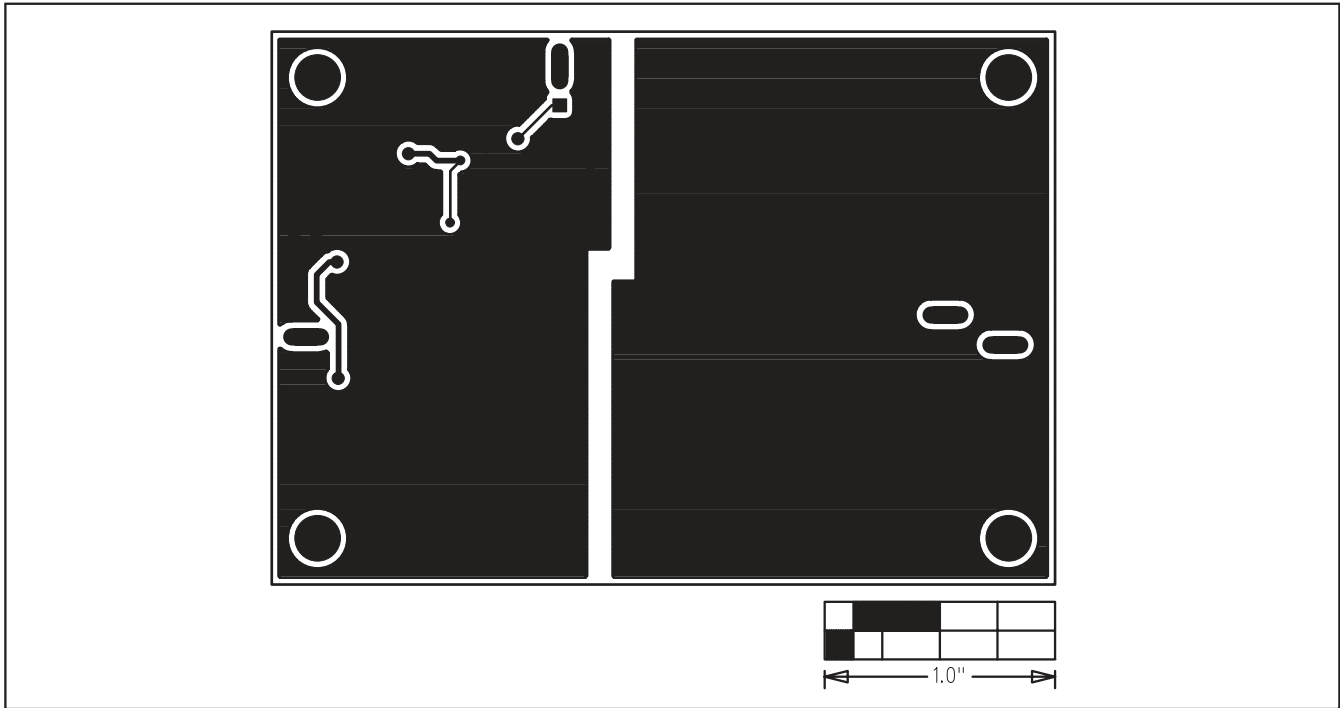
MAX5052A EV Kit PC Board Layout—Solder Side
